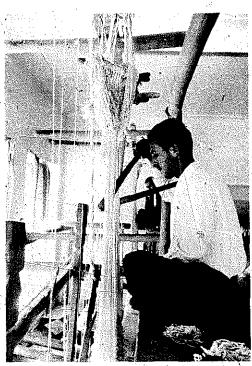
A Shed Formed by Draw Harness Figure 291 A Draw Boy Lifting Drawstrings
